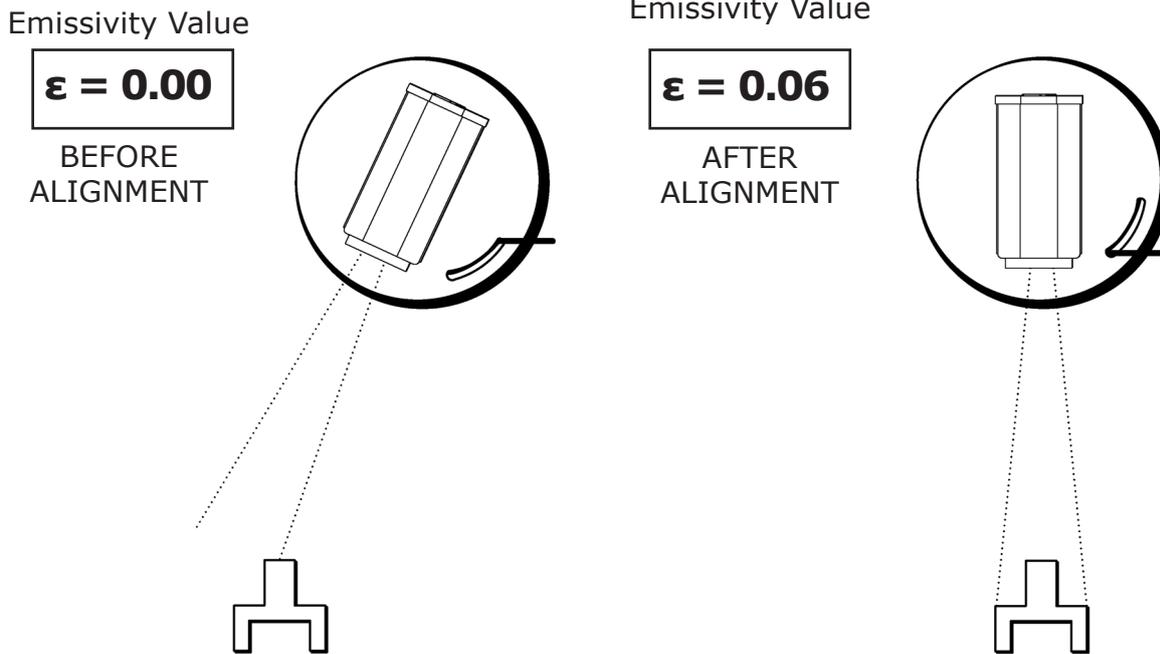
Using the Quick-adjust Mount on Multi-cavity Dies
